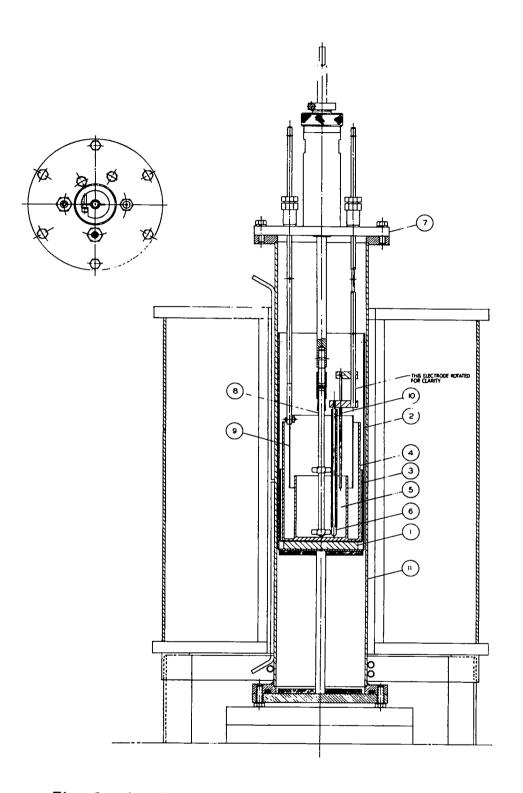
Assembly, electrorefining furnace, 3.5 kg. scale. Drawing No. 26Y-72524 El
